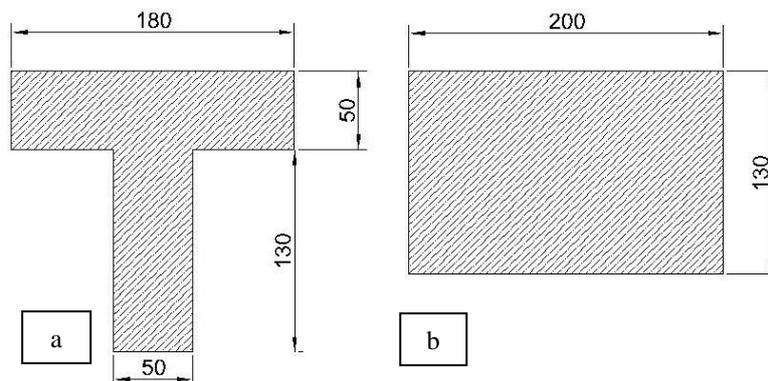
Dimensions of the T-Plate (a) and base plates (b) in superior view.
